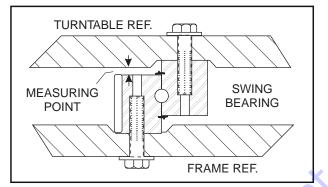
Swing Bearing Tolerance Measuring Point
